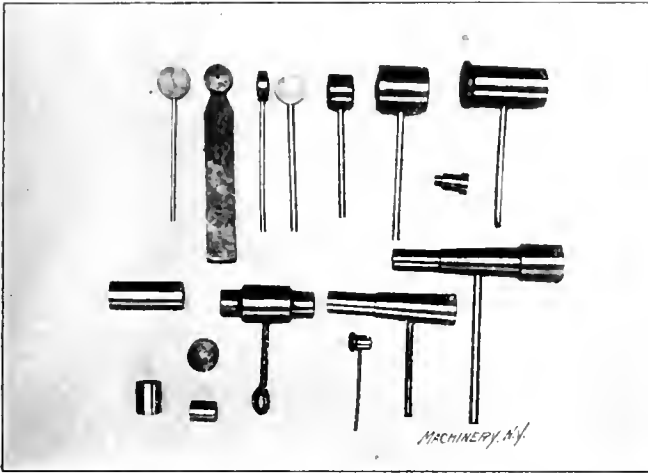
"Typing" Tools used by Die-sinkers to Form Circular Cavities.
